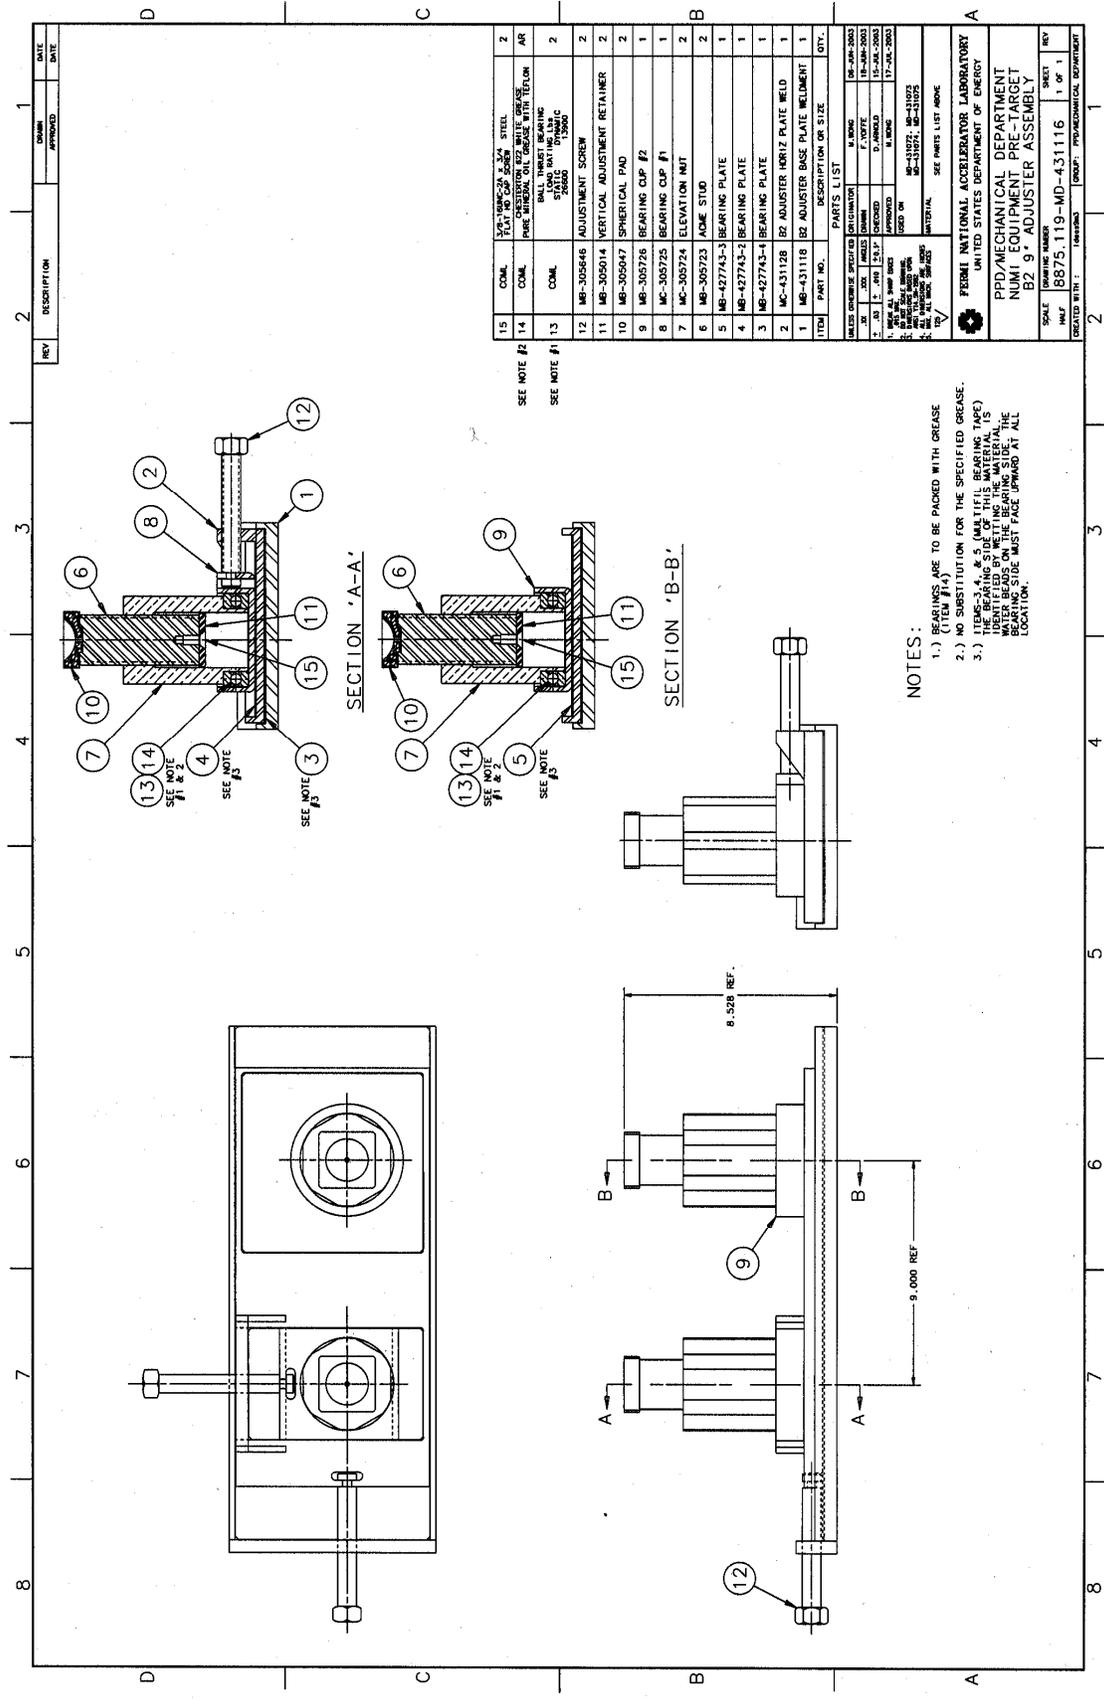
Adjuster Assembly for B2 Magnet (8875.119-MD-431116)
